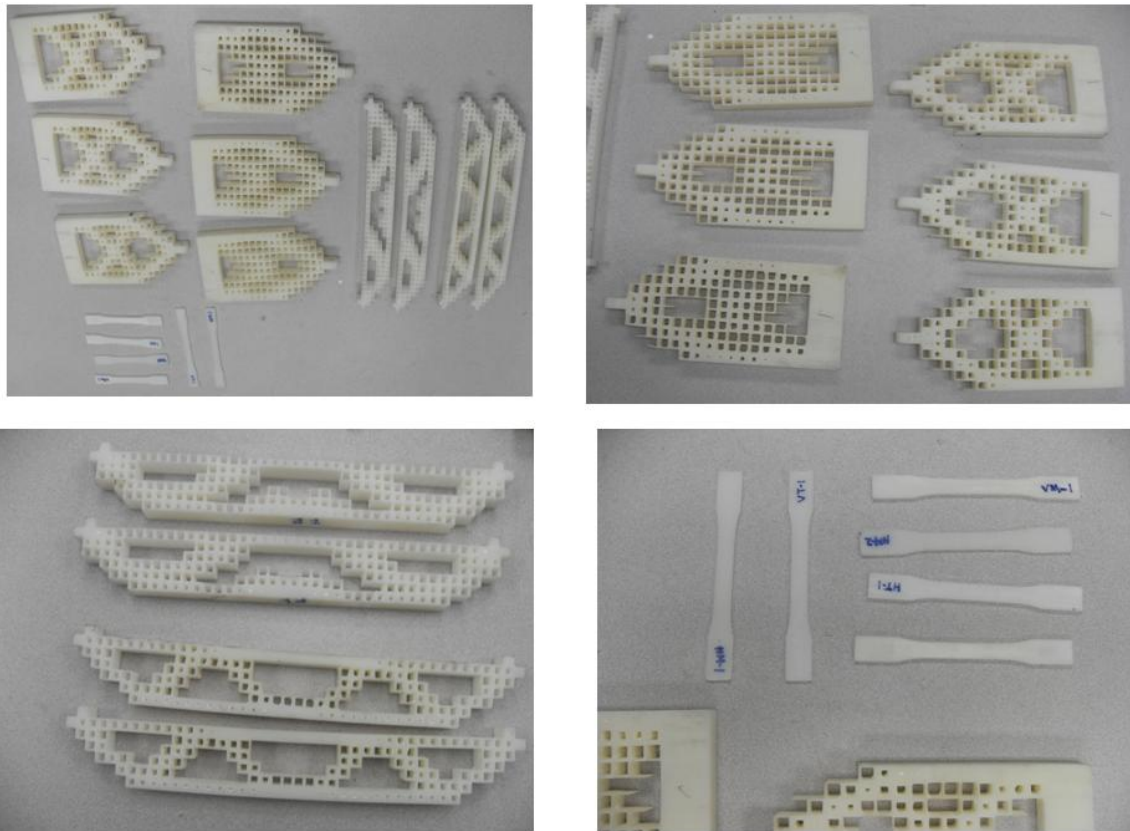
Fabricated parts - Cantilever, MBB beams and Tensile specimens
